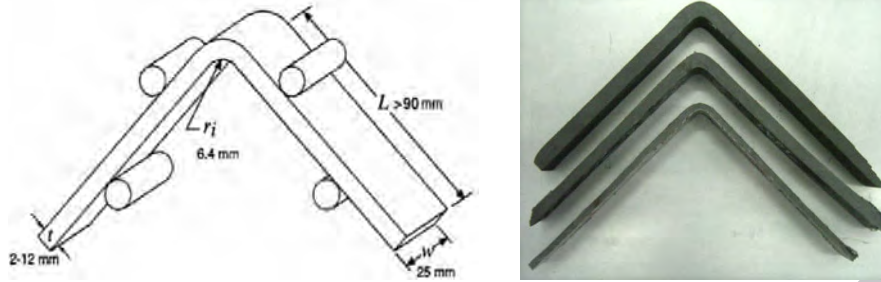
Curved Specimens: Dimensions ASTM D6415 (left); 4, 8 and 12 layered test coupons (right).
